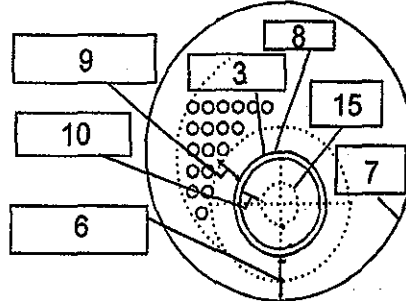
B - SOME OF THE BREATHING SPACES OF REVERSIBLE FLAME BOILERS
